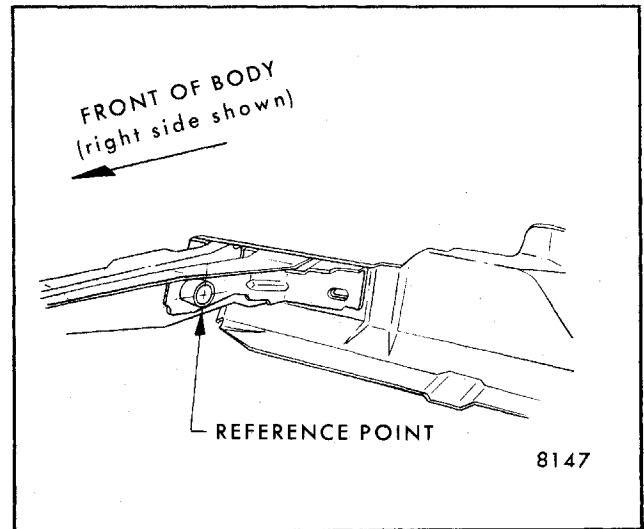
Side Rail at Rear Spring Shackle Bushing - "F" Bodies
